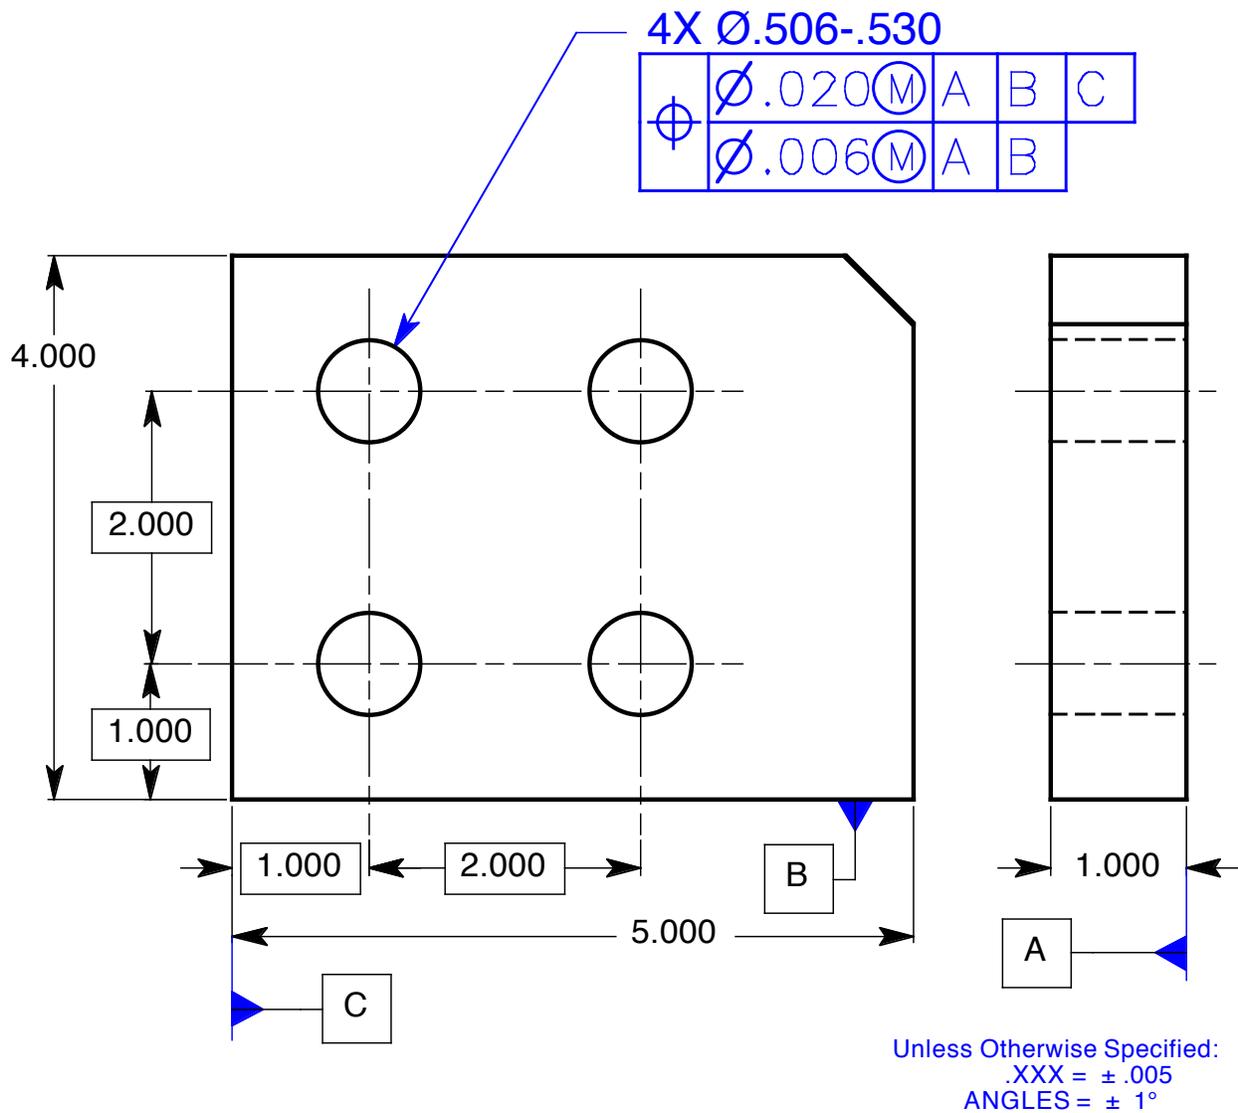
A composite positional tolerance with datum features A and B repeated in the lower segment of the feature control frame.
